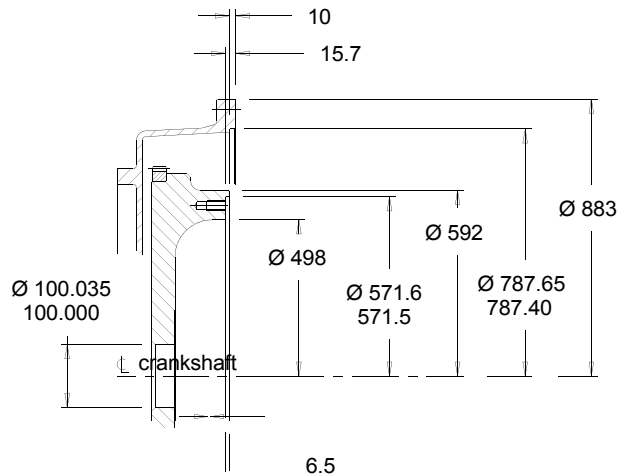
size 21 flywheel and SAE J617 No. 00 flywheel housing (metric tappings) scale 1:5
